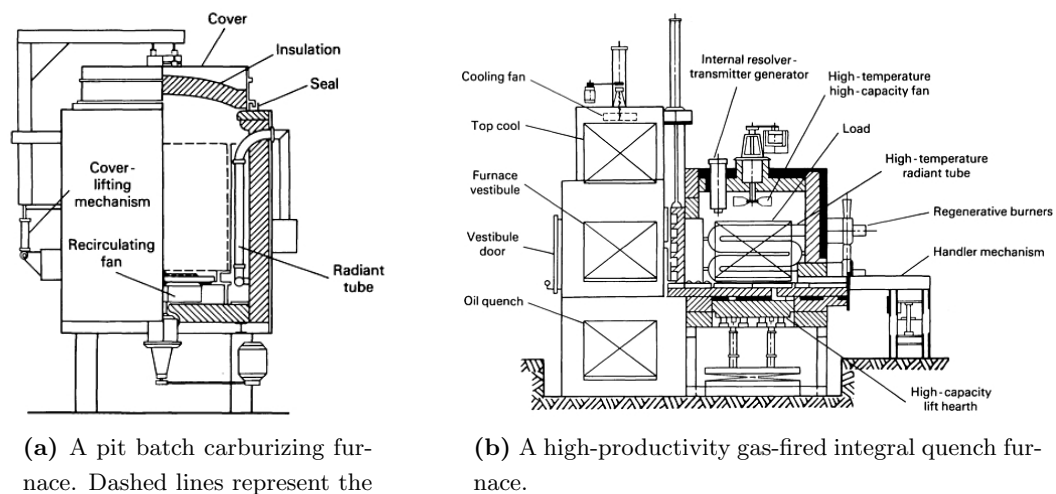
Carburizing furnaces - Layout of typical batch furnaces for carburizing.
